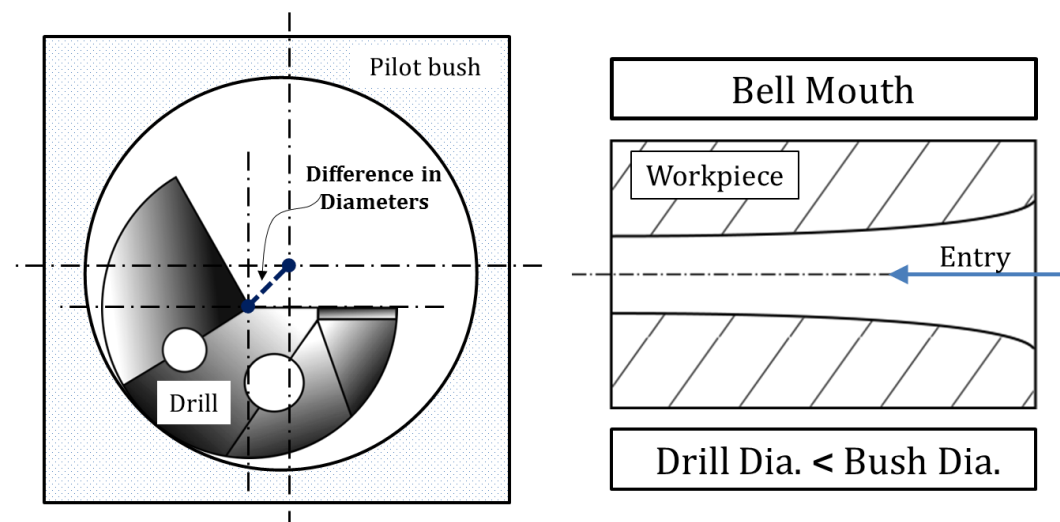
Bell mouth formation in deep hole drilling due to large clearance at pilot bush
